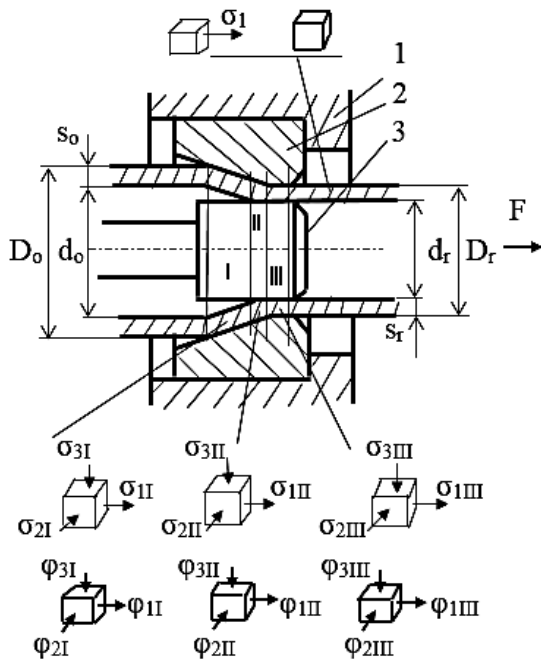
Scheme of tube drawing with fixed cylindrical plug with stress strain states: 1 – die holder, 2 – die, 3 – fixed plug
